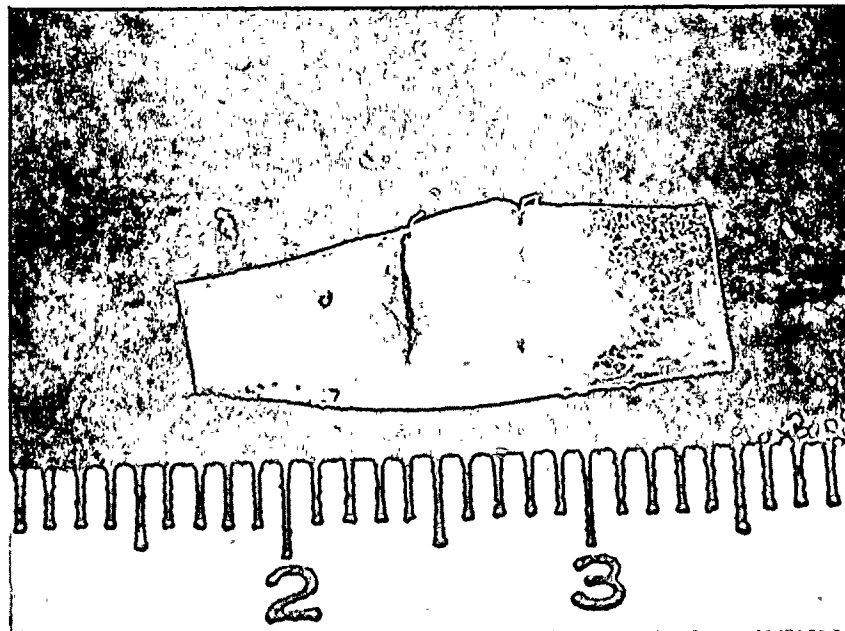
Penetrant examined view of Boat Sample F removed from field weld FW-5 of Loop 12.
